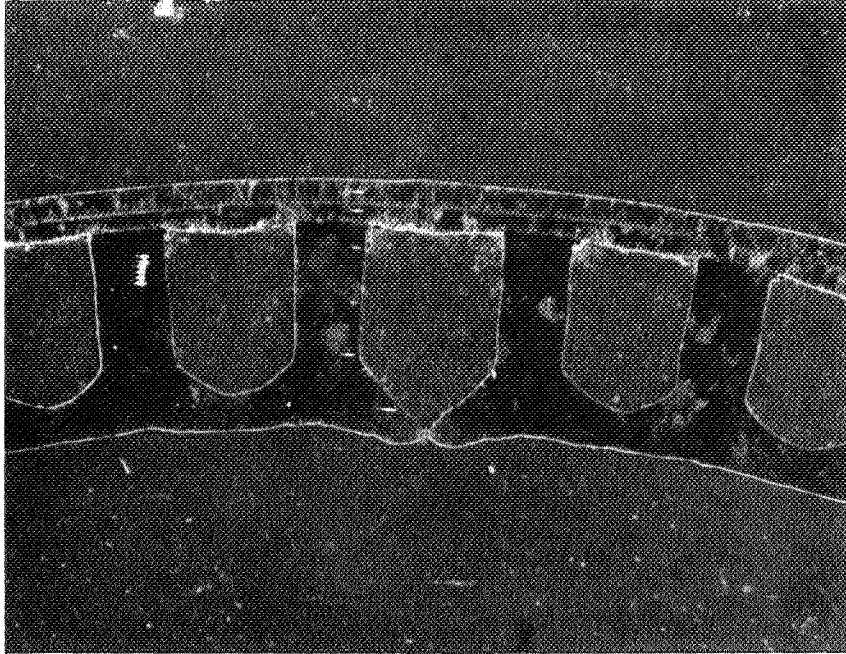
Crack in coolant-channel wall of chamber 74. X7.
